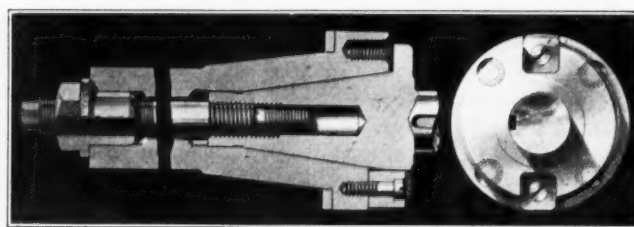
Sectional view of typical spindle equipped with standard spindle nose, showing draw-in arbor bolt, large taper and key-driven arbor
